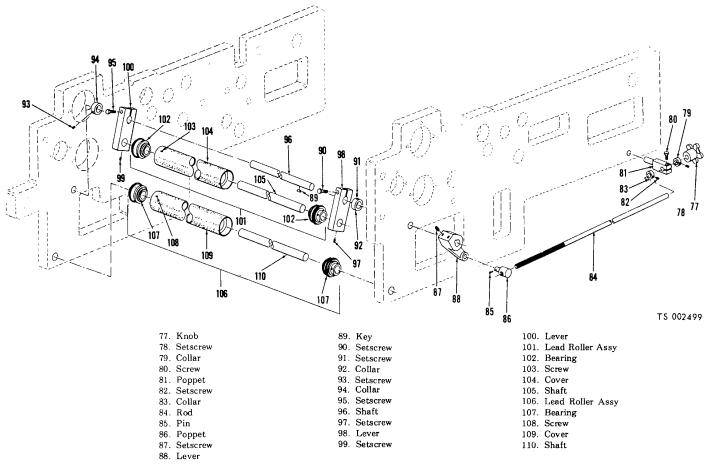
Trolley, paper guide and nipping roller alignment assembly (Sheet 3 of 7). 4-96
